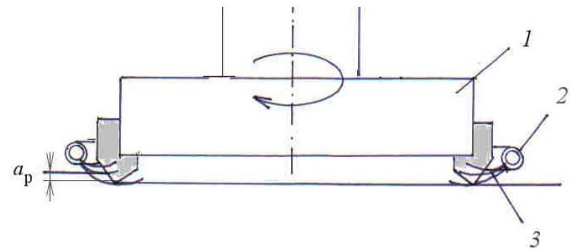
Way of heating the plates of milling head. 1 - head body, 2 - tube, 3 - flame
